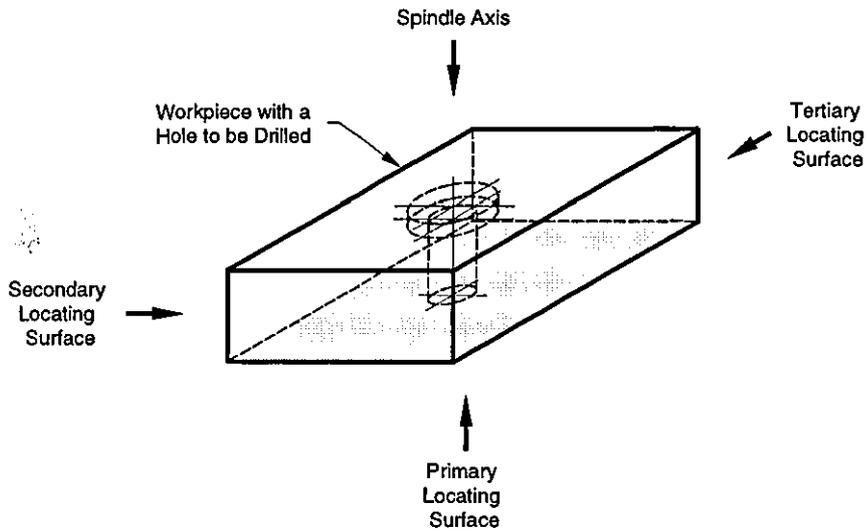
A – A Prismatic Workpiece Using the 3-2-1 Locating Method
